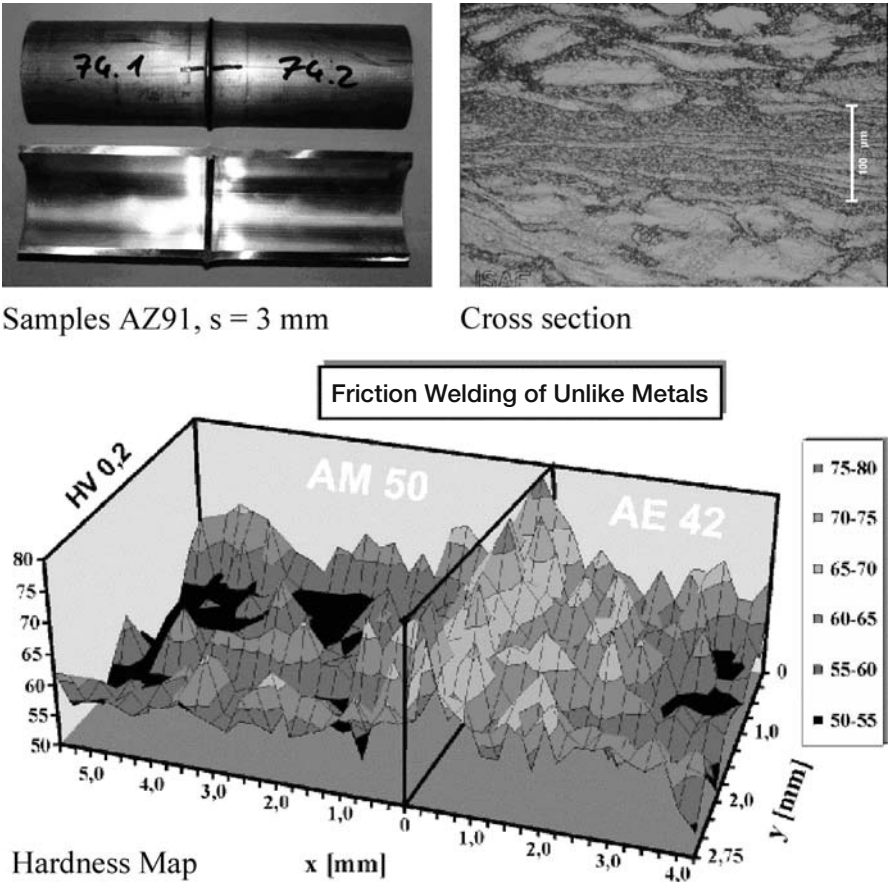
Friction welding of forged magnesium tubes
